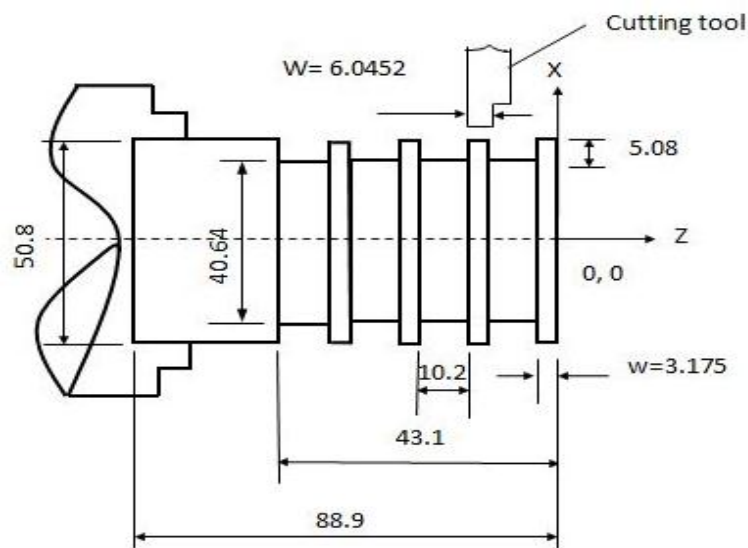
Titanium Alloy Workpiece with Ribs Clamped in the Lathe Chuck to Simulate Orthogonal Turning
